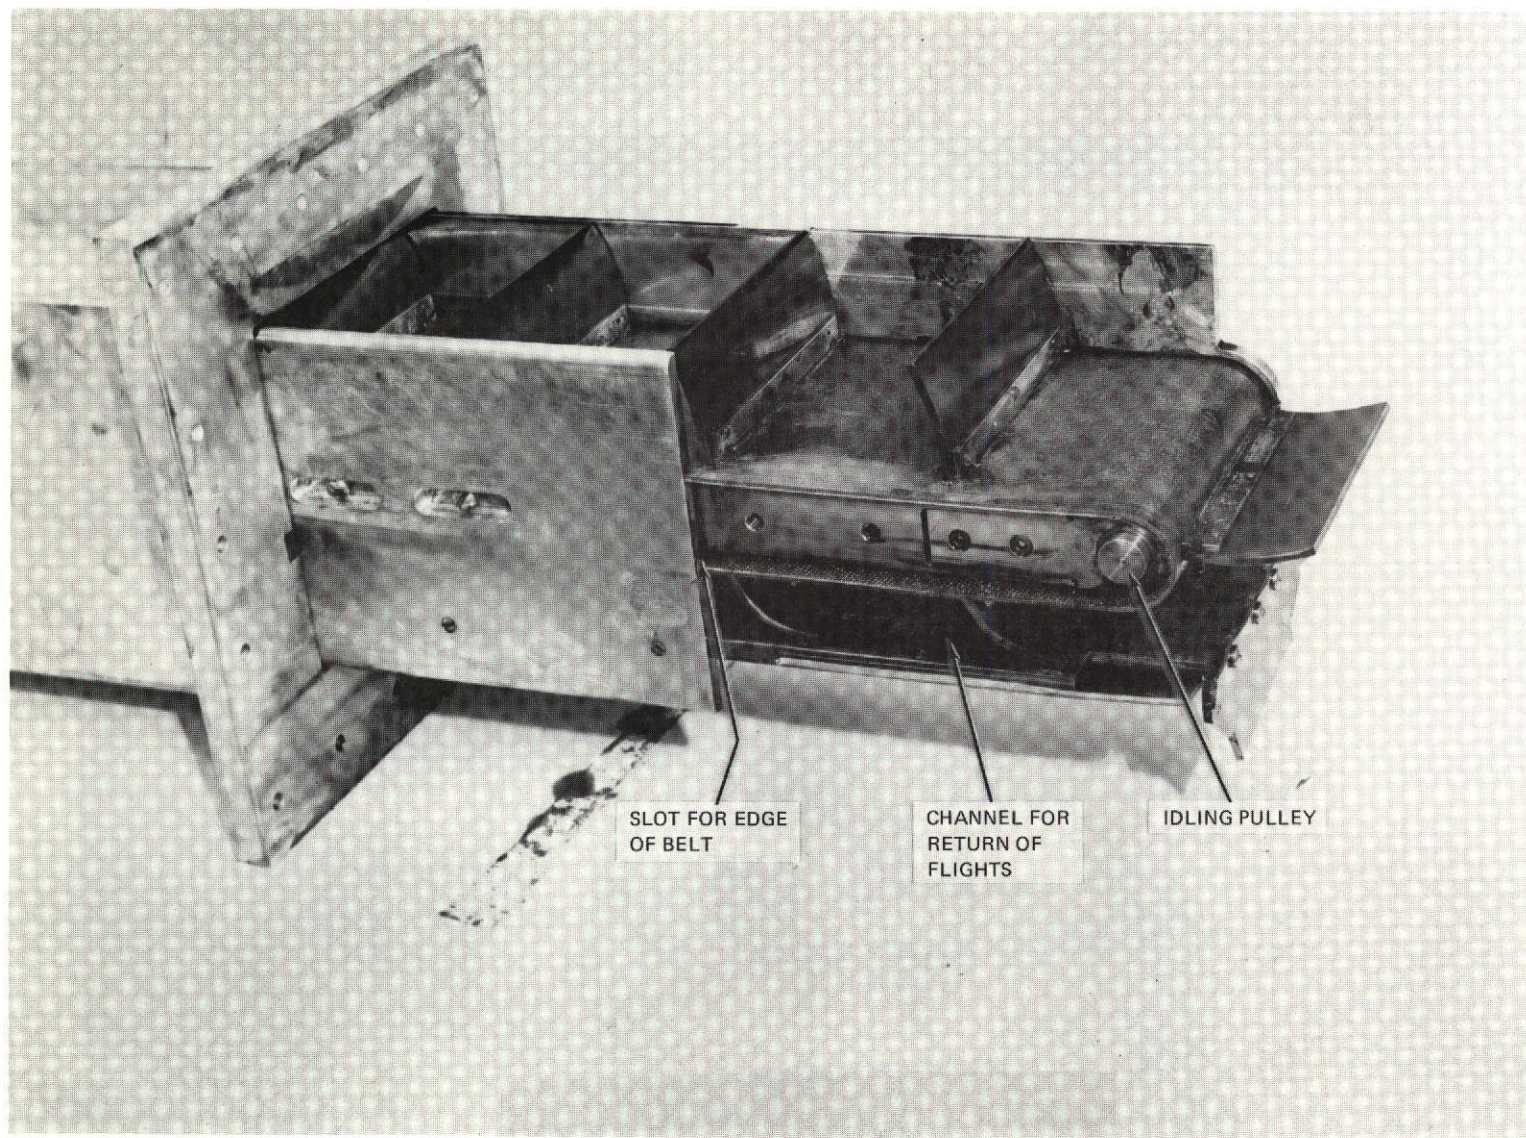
MODIFIED FEED CONVEYOR – PARTLY DISASSEMBLED
